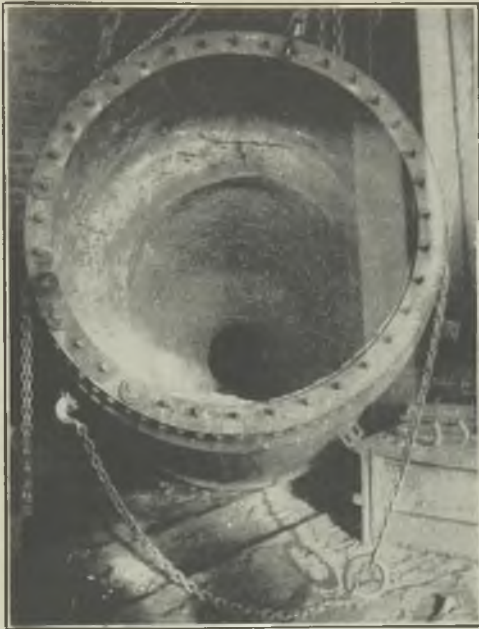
THE CONE REMOVED FROM THE BURNER END AND THE SHELL STRIPPED TO THE TAPPING HOLE.
